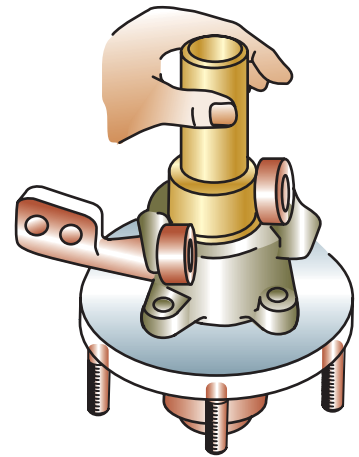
Removing the steering knuckle from the lower control arm.
